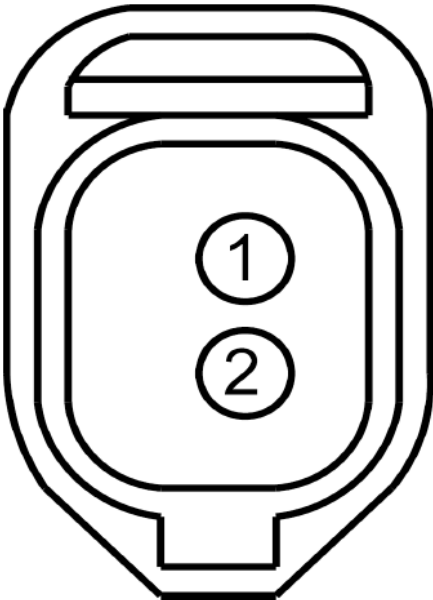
Left Rear Lamp Assembly Connector End View (C414D)
